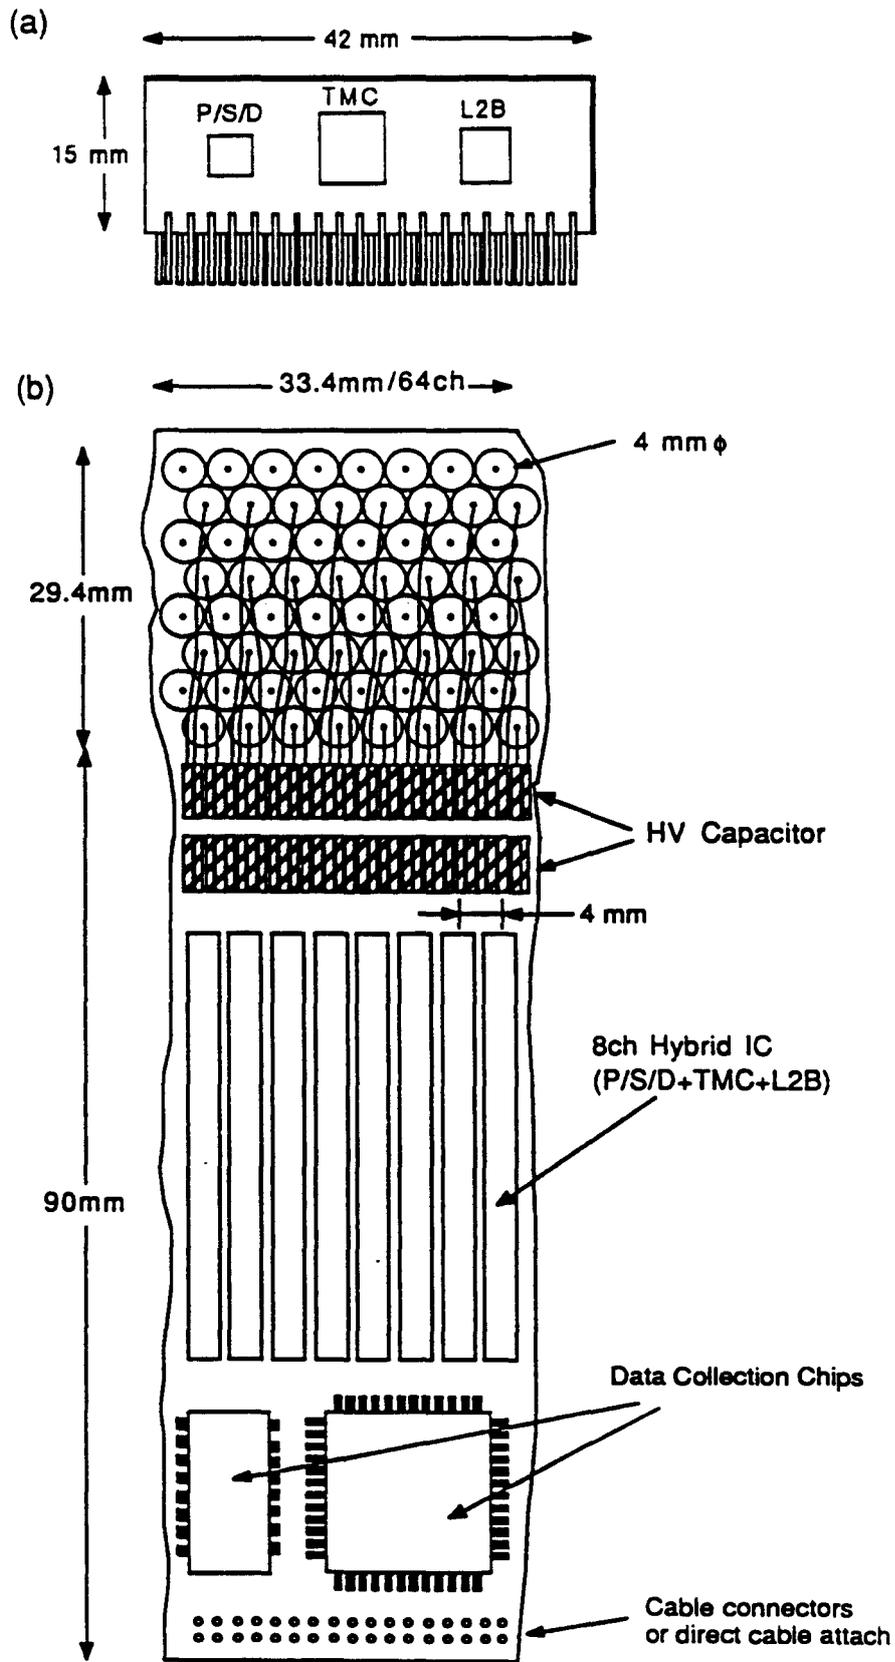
Mounting Example of (a) the Hybrid IC and (b) the Front-End Board.
